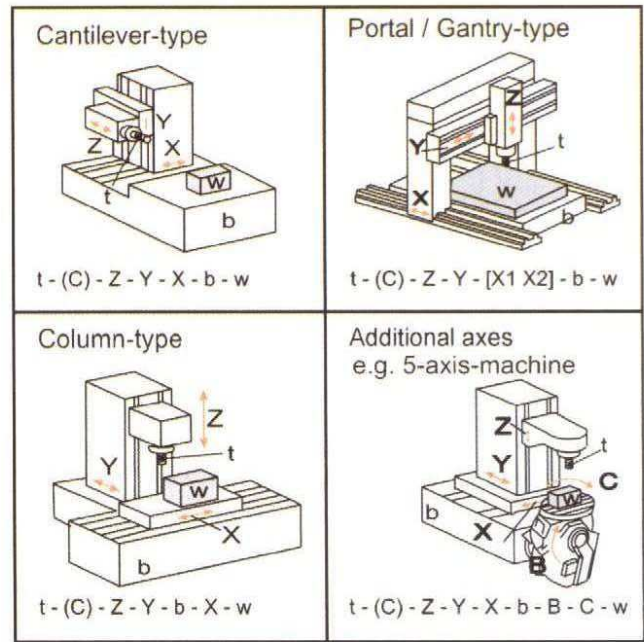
Serial kinematics abstracted to kinematic chain (t: tool; b: bed; w: workpiece) [164].
